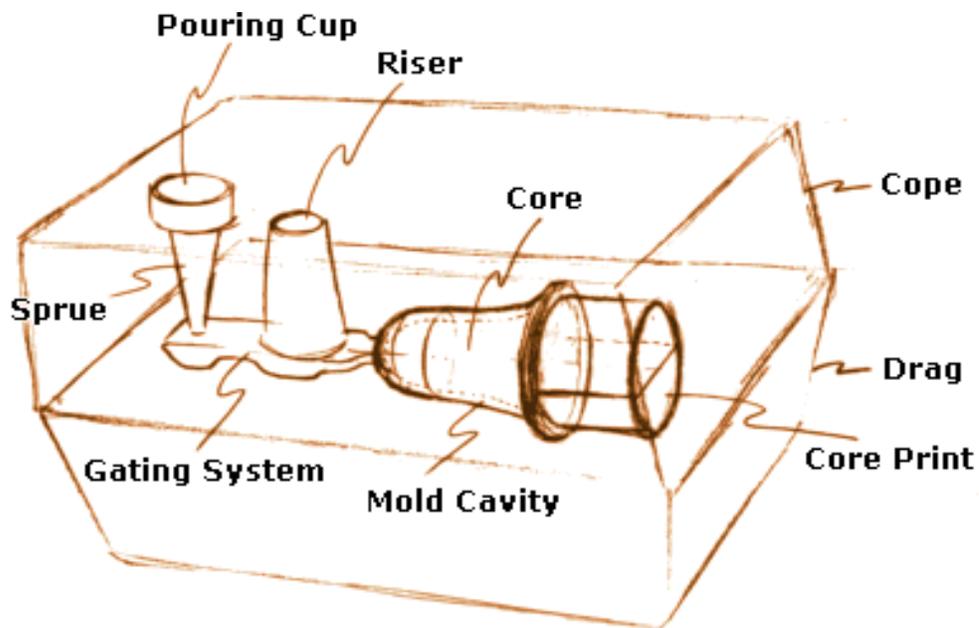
Typical Components of a Two-part Sand Casting Mold.Refer^[1]
